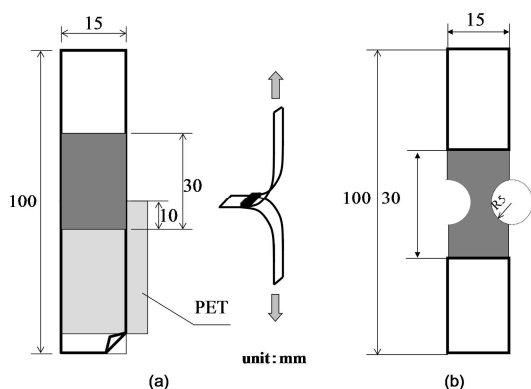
Illustration of peel test specimens; (a) peel test, (b) circler notch test
